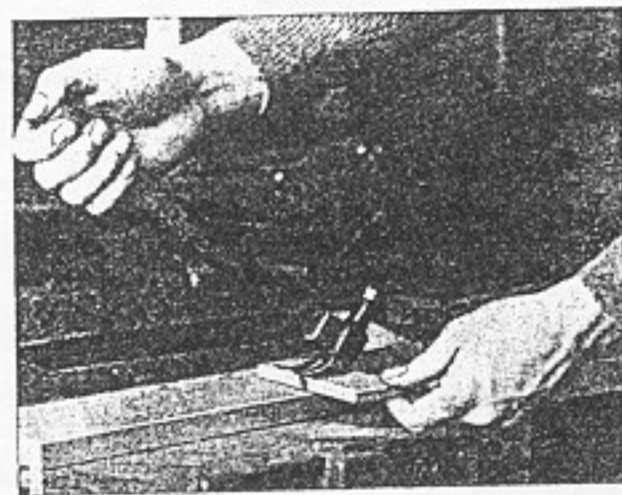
Pulling nail with claw hammer. Block placed under hammer head to protect the surface of the wood.
